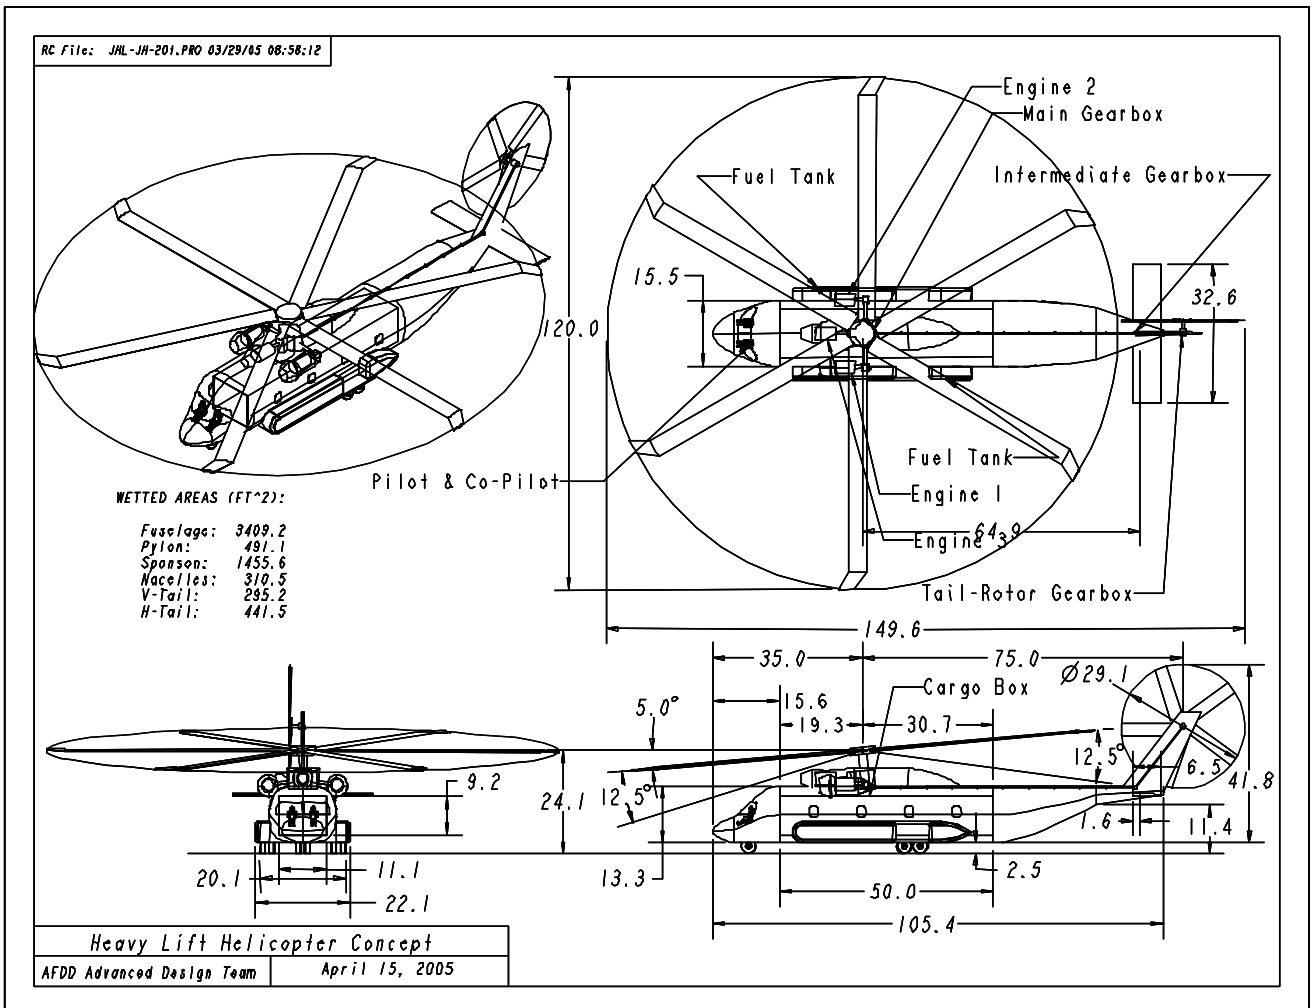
Single Main Rotor JHL 3-View Drawing<sup>8</sup>
